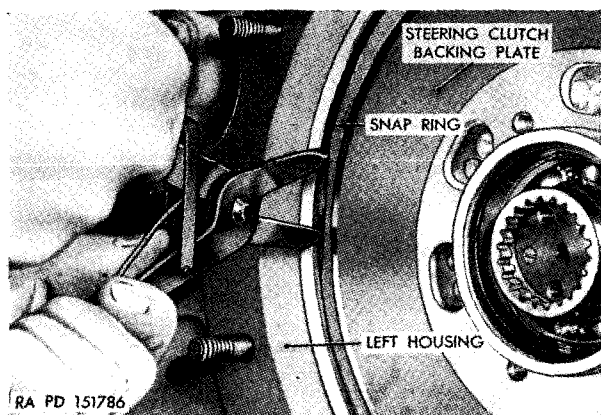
Removing steering-clutch-pack snap ring using pliers (41-P-1992-36).
